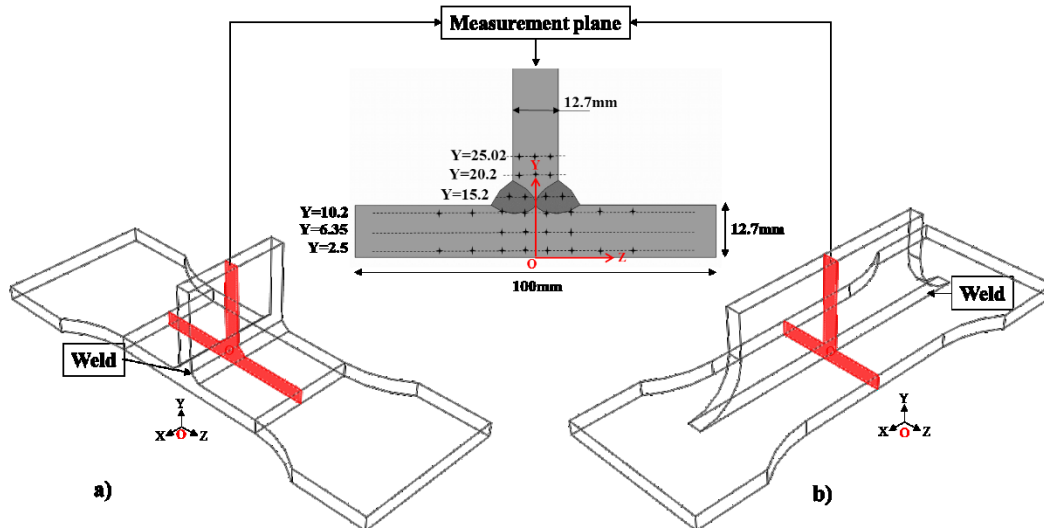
Measurement locations in fillet welded specimens: a) Fillet welded plate with the short weld, and b) fillet welded plate with long weld
